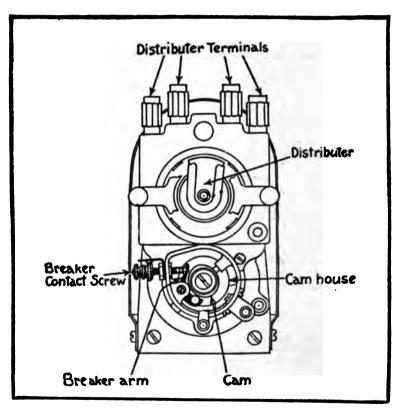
Front View of Remy Magneto, Showing Construction of Distributor and Contact Breaker.
